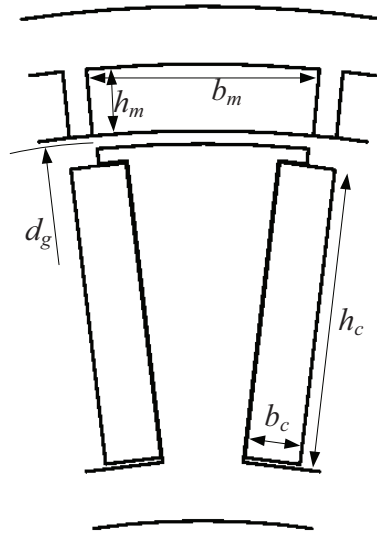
A machine section showing the machine dimensions optimized in the design optimization.
